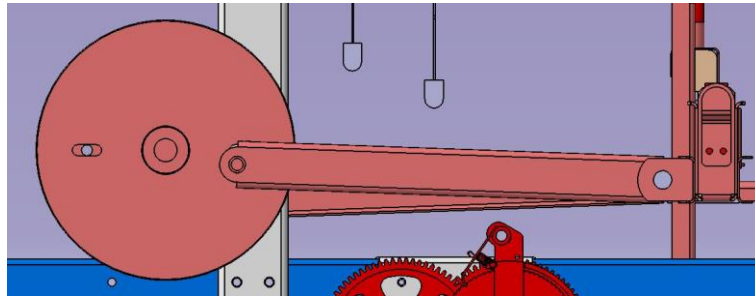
Crank with flywheel mechanism of De-sign semi-automatic handloom
